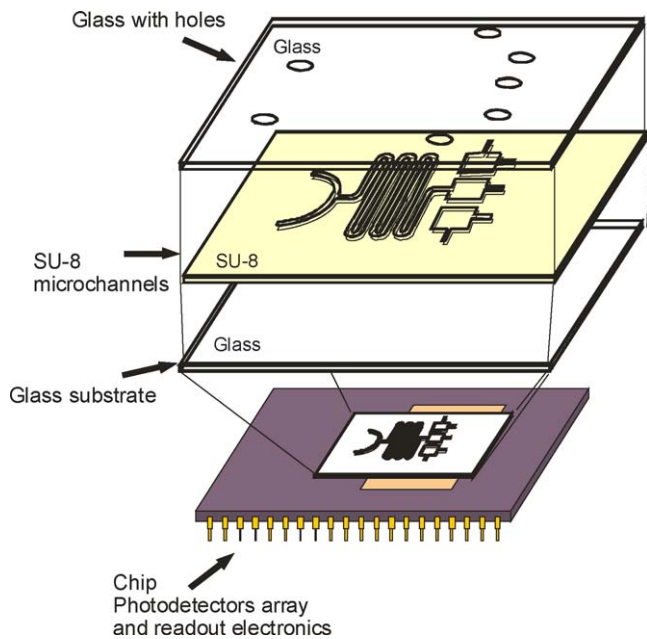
A drawing of the constituent prototype pieces integrated fluidic die.
